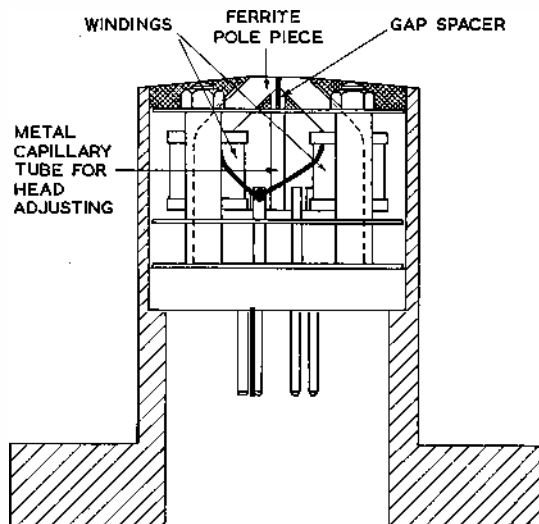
Magnetic recording head with outer cylinder sectioned to show constructional details
